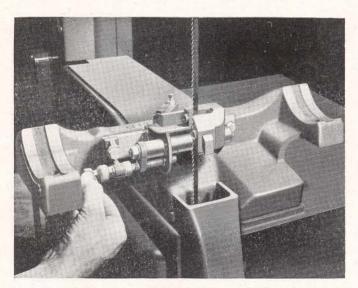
Trunnions, with Table Removed to Show Lower Guide Adjustments.
